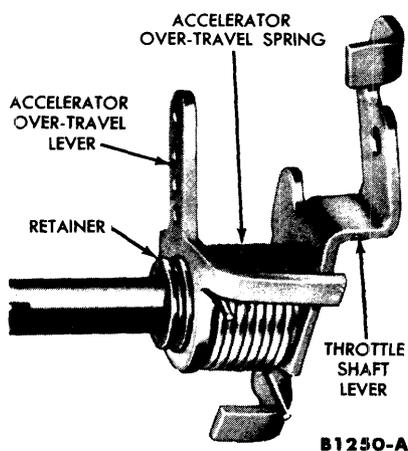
Accelerator Over-Travel Spring & Lever Installation
